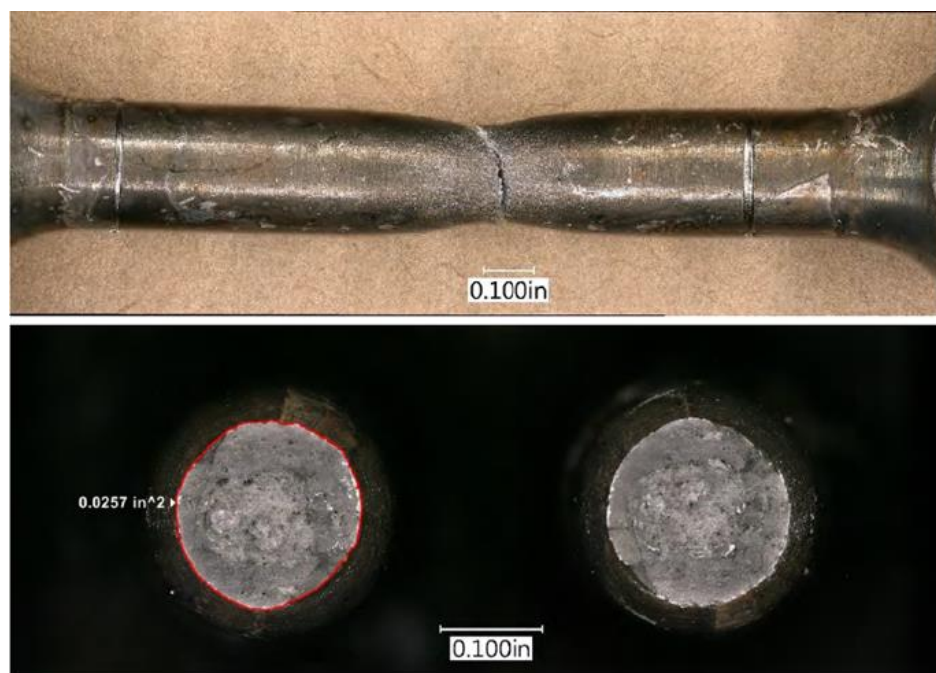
Photographs of Tested Tension Test Specimen QT-18 and Corresponding Fracture Surfaces – Base Metal Plate, Heat No. B4197-2, Transverse Orientation, 550°F
